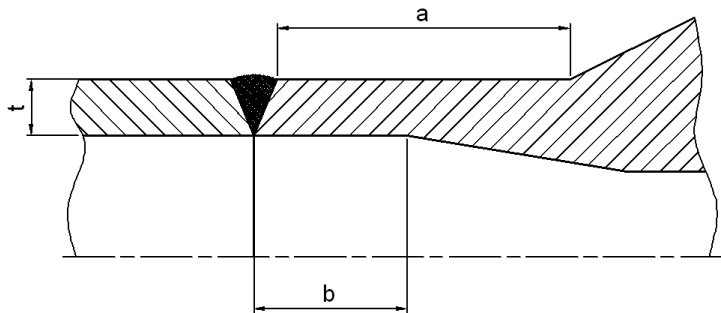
Requirements for in-service inspection of welds, part 1 [30]
